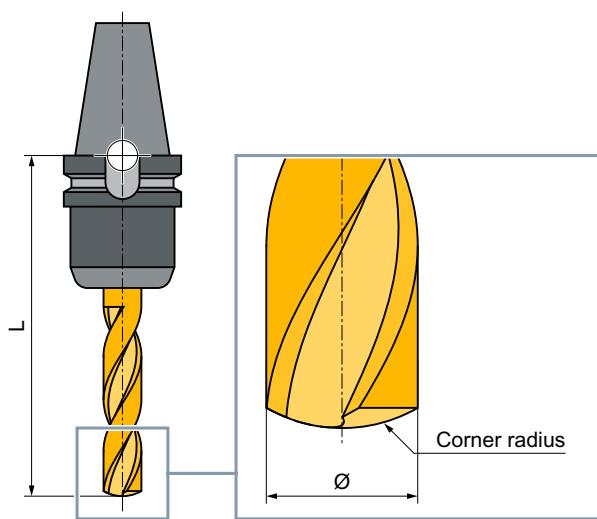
3D tool type with an example of a ballhead cutter (Type 111)
